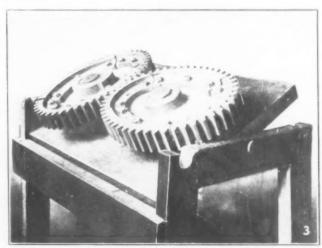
ASSEMBLING STAND FOR ELLIPTICAL GEARS
